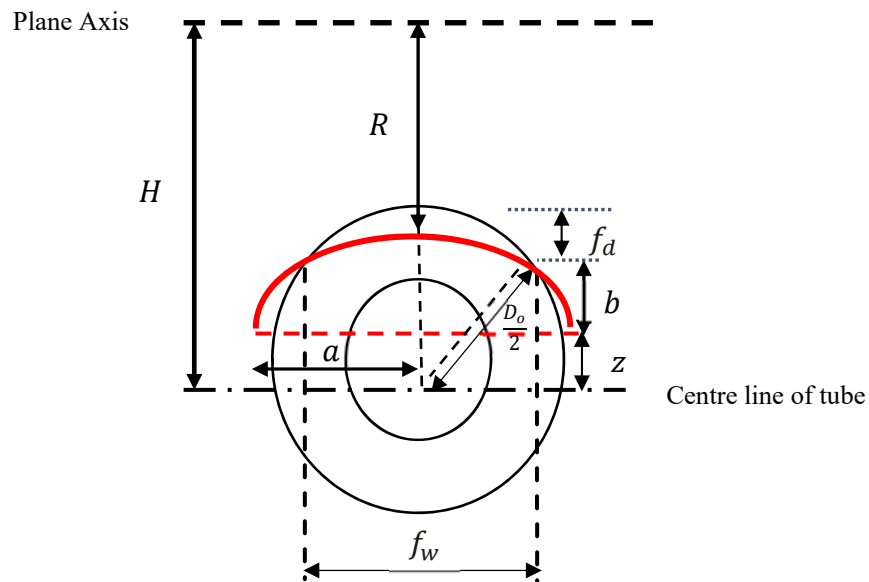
Front view of the n-shaped flaw showing the cutting plane in red, intersected with the tube cross-section.
